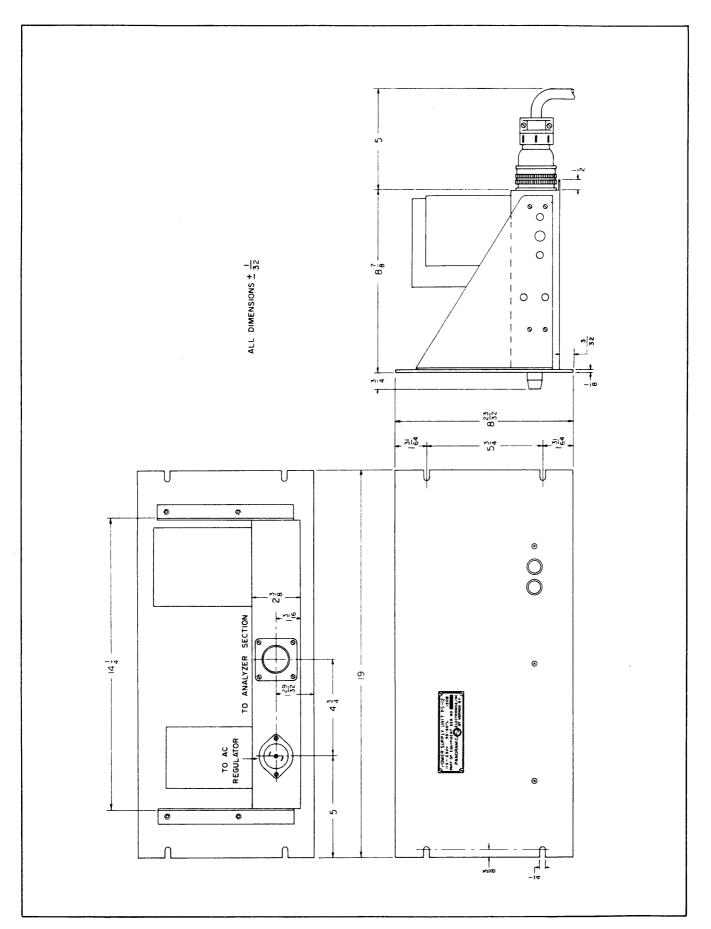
Outline Dimensional Drawing, Model PS-12, Rack Mount Style.
